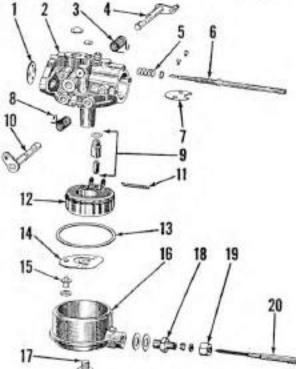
Exploded view of Carter N type carburctor used on early models
